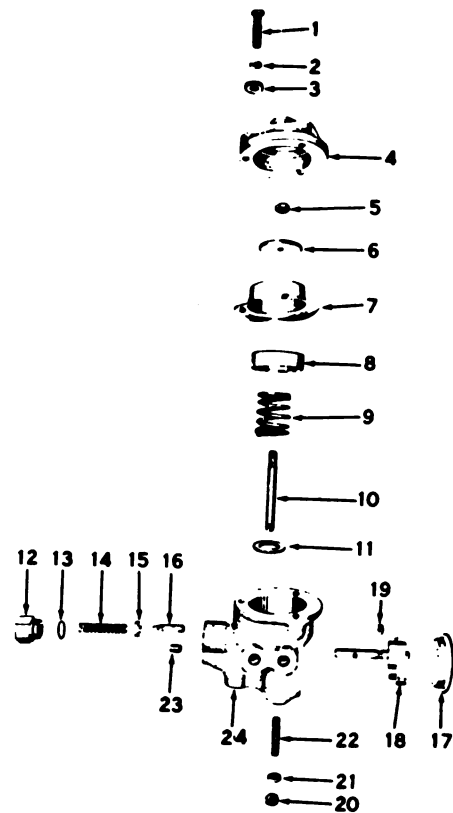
Aneroid, removal, disassembly, reassembly, and installation (sheet 1 of 2).
